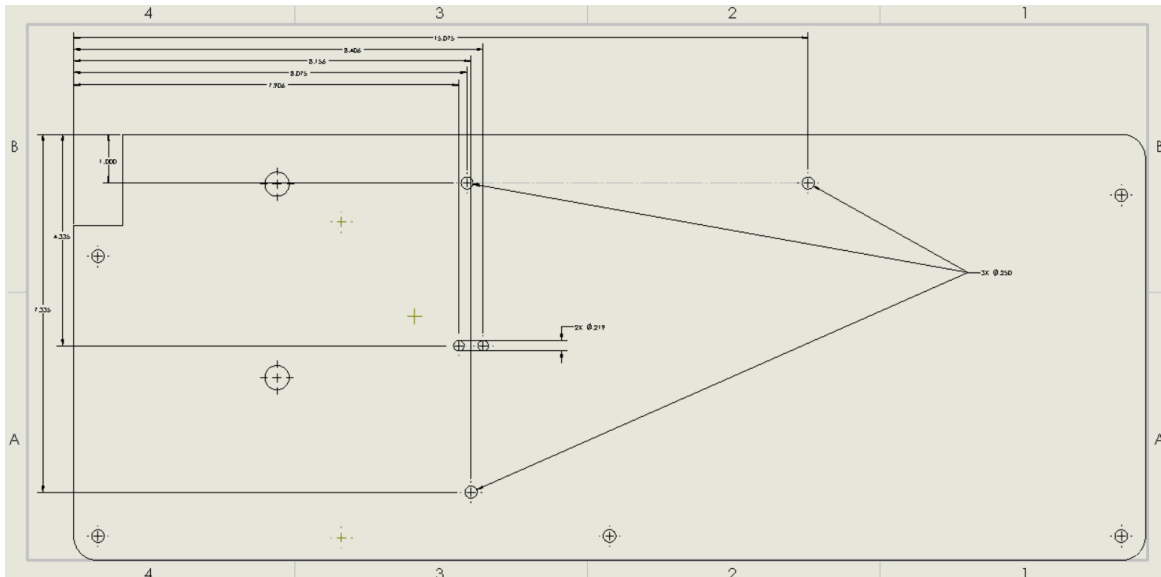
SOLIDWORKS drawing of the second piece of the baseplate
